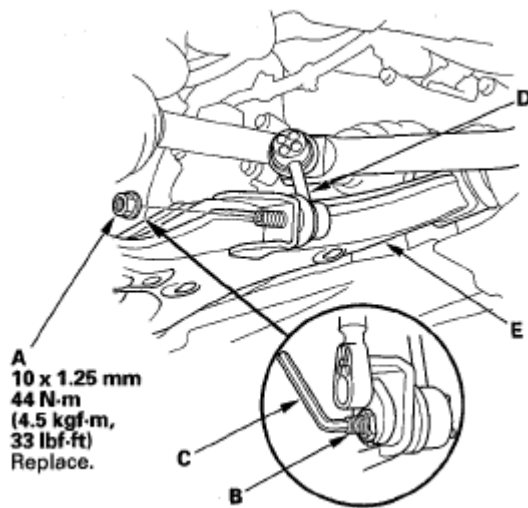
Identifying Joint Pin Flange Nut With Torque Specification
